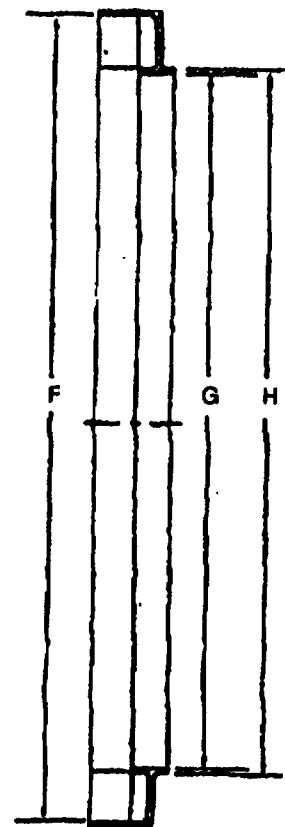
Inlet Housing Internal Corrosion Inspection Criteria.
